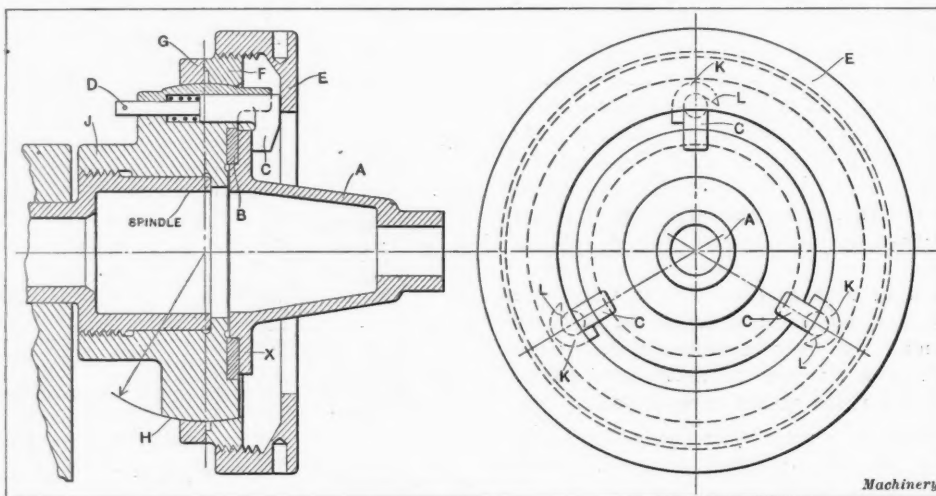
Quick-acting Compensating Holding Device for Automobile Hub
